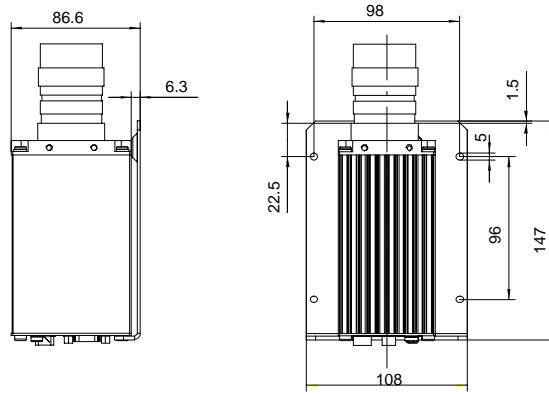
Dimensions with a Mounting Bracket Attached (Side Mounting)
